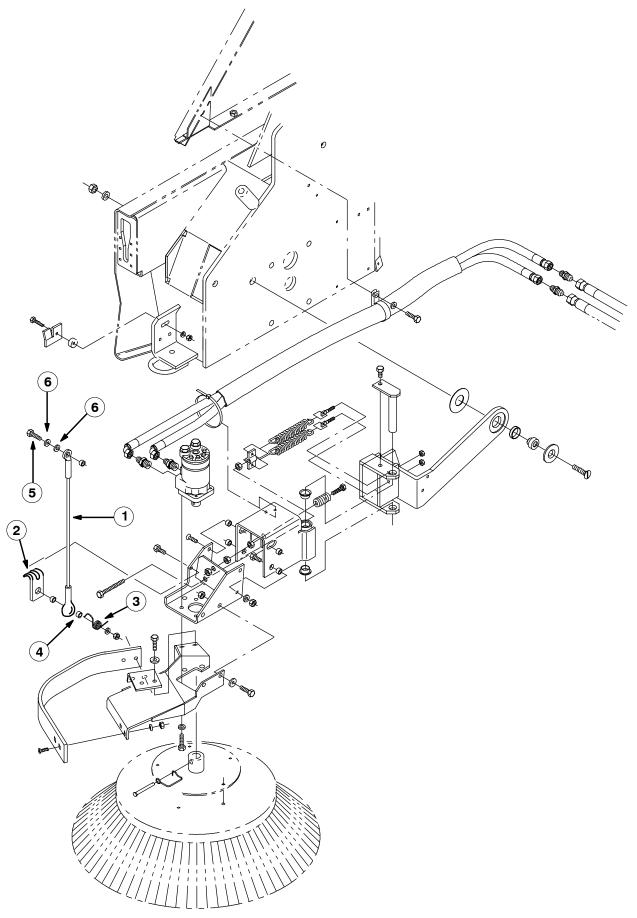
Side Brush Cable Replacement Kit, Right Side
